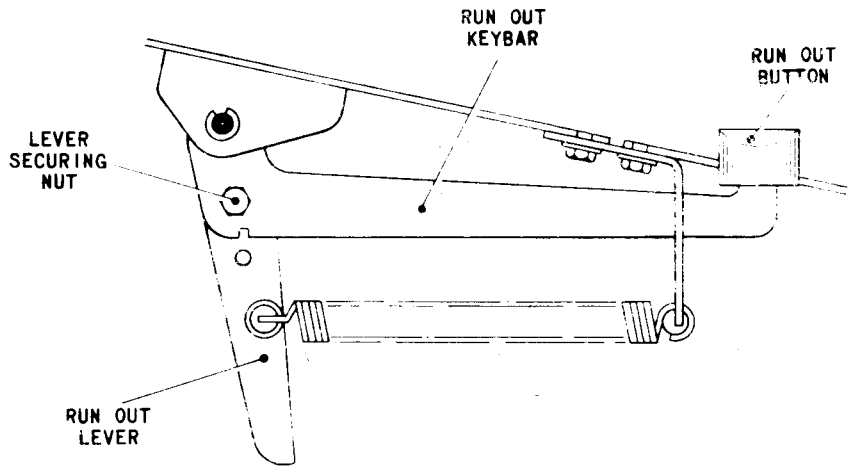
RUN OUT KEYBAR ASSEMBLY
